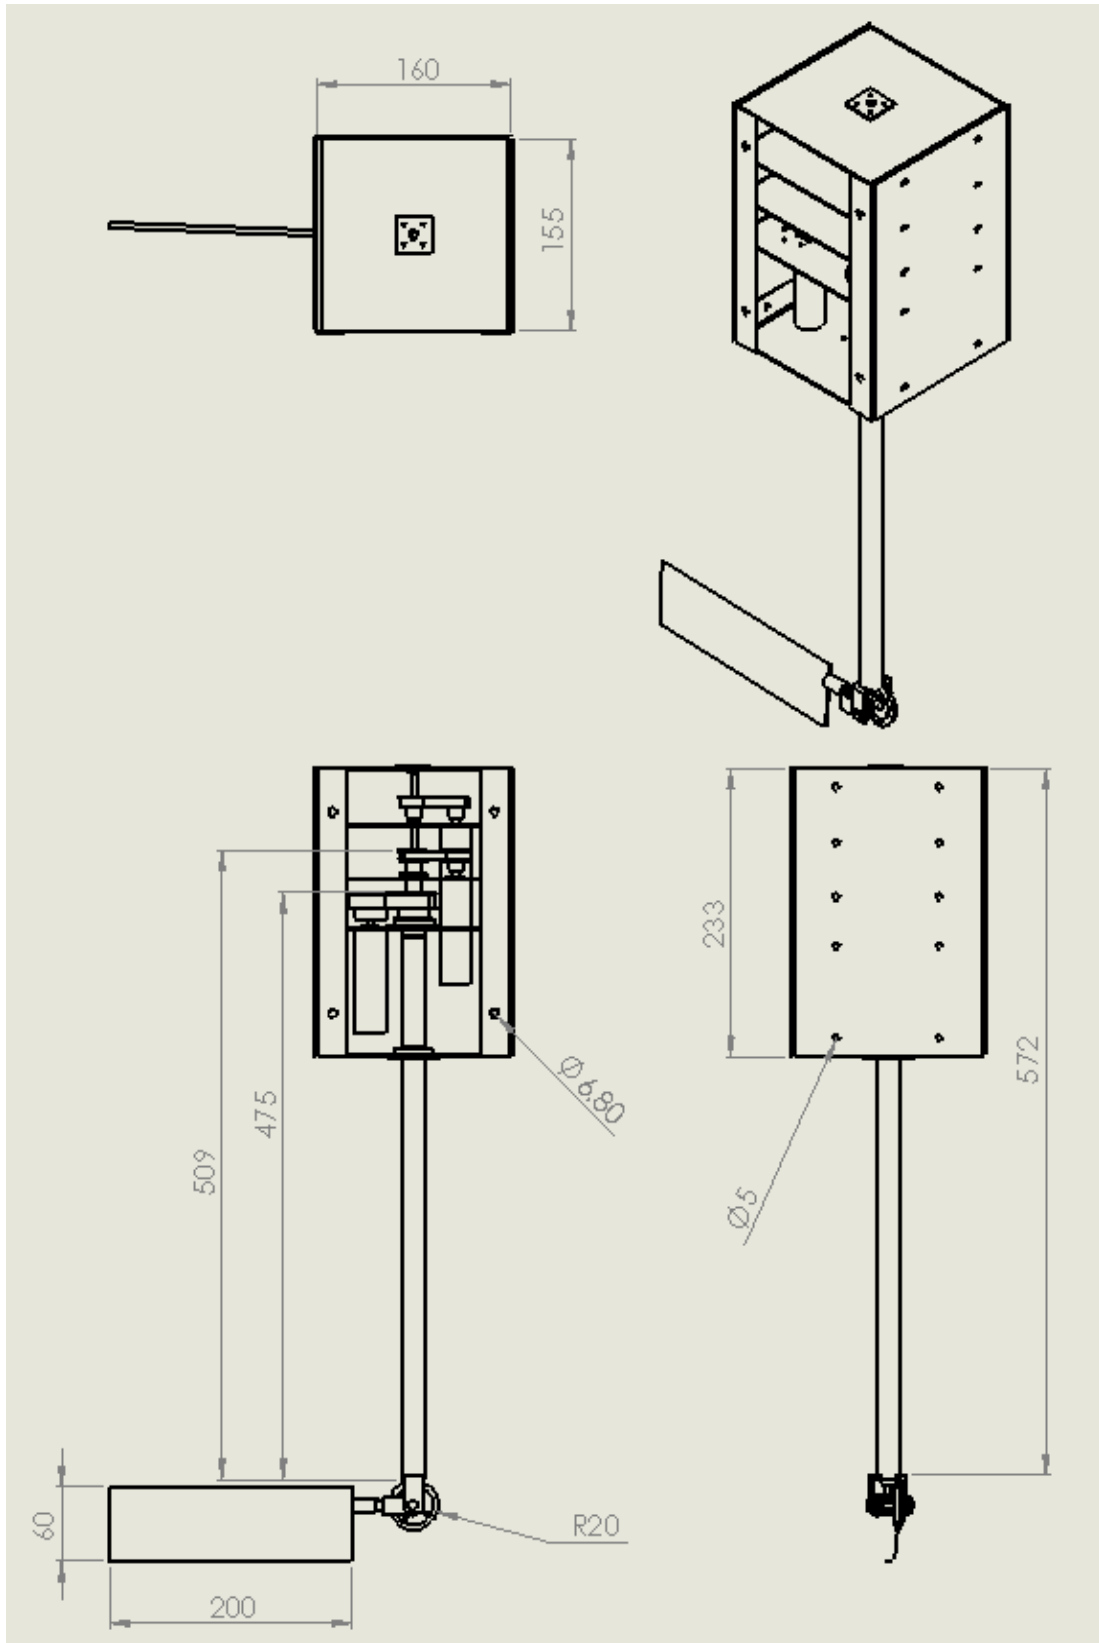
Technical drawings of the wing module with dimensions (unless otherwise specified all dimensions are in millimeter)
